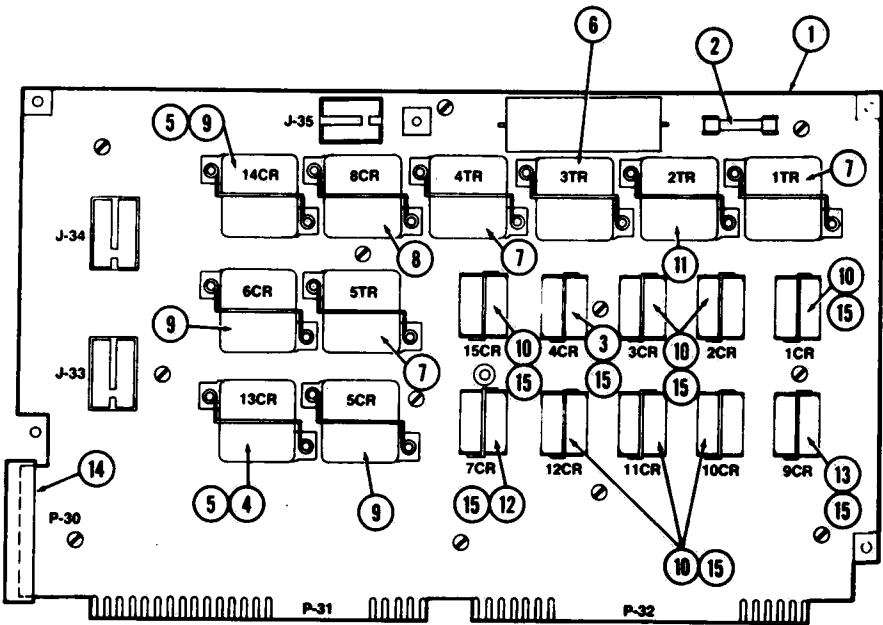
PRINTED CIRCUIT BOARD ASSEMBLY: Power Door.
